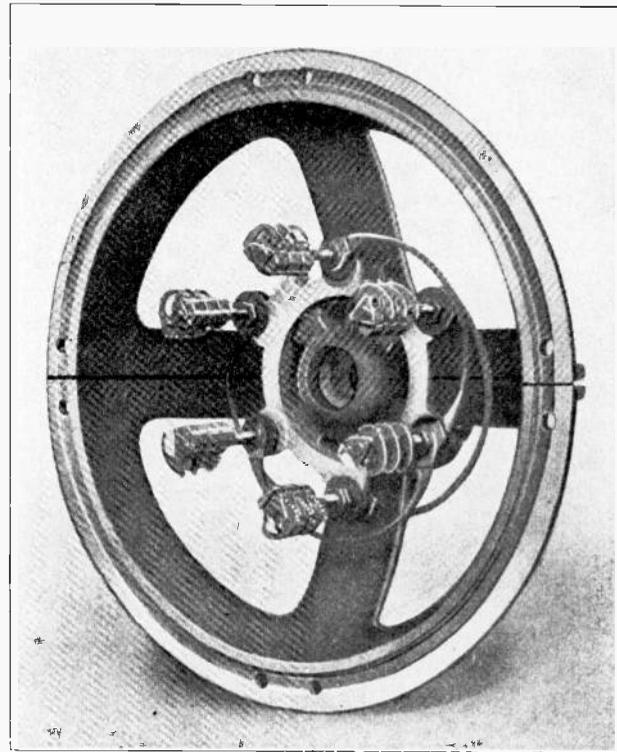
This view shows a complete set of brushes and holders mounted on the rocker arm, which in turn is fastened in the end bracket of the machine.
